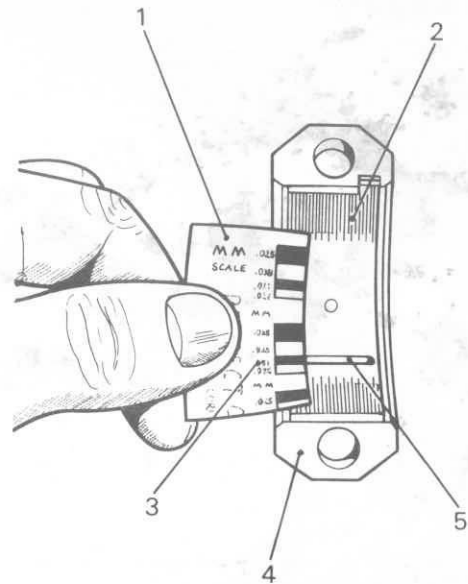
19 Checking big-end running clearance. The gauge is being used to measure the width of the 'Plastigage' after it has been flattened
